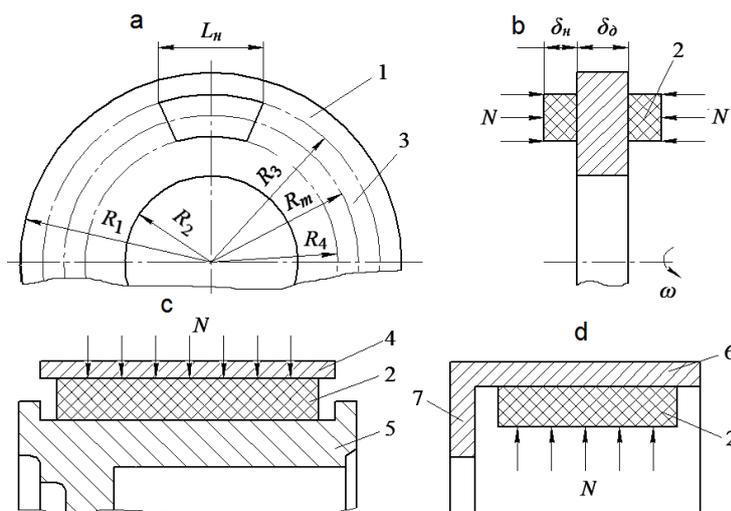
Diagrams of various types of friction units of brake devices: a – disk-block (longitudinal section); b – disk-block (transverse); c – band-block (cross-section); d – drum-block (cross-section)
